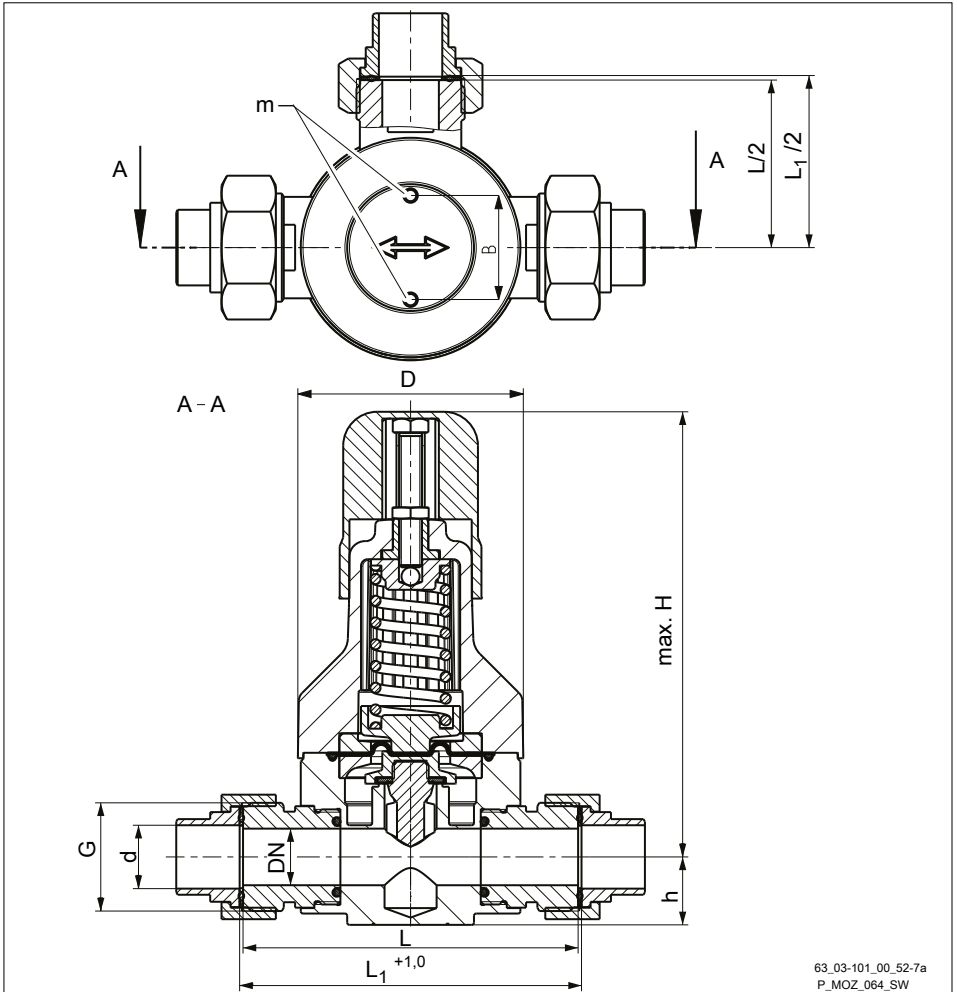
Dimensional drawing of DHV-UR SS - dimensions in mm
